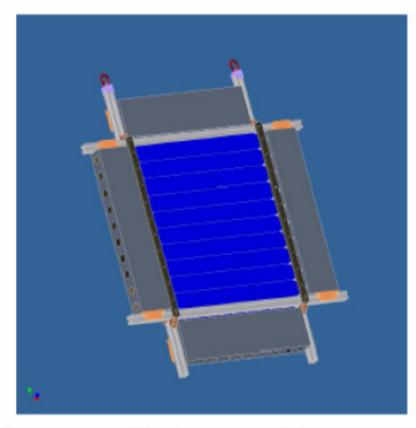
CAD drawing of TOF2 with local shieldings for PMTs, using a single bar of ARMCO 6 cm thickness for each side.
